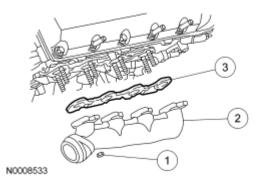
Locating Exhaust Manifold Courtesy of FORD MOTOR CO.
